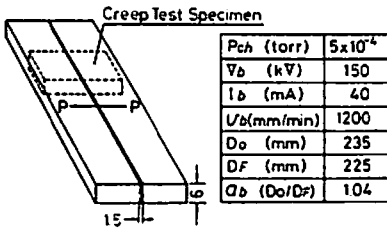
EB welding conditions for creep test specimen of EB welded joint
